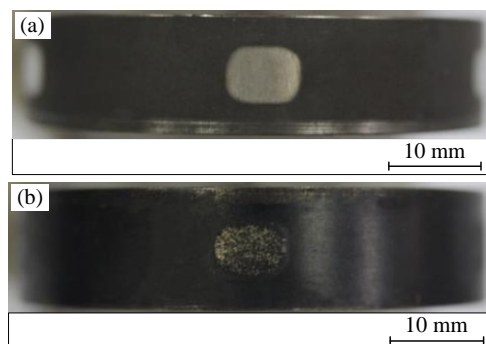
Cross-sections of the lug bosses. (a) 304 stainless steel; (b) Inconel 718.
